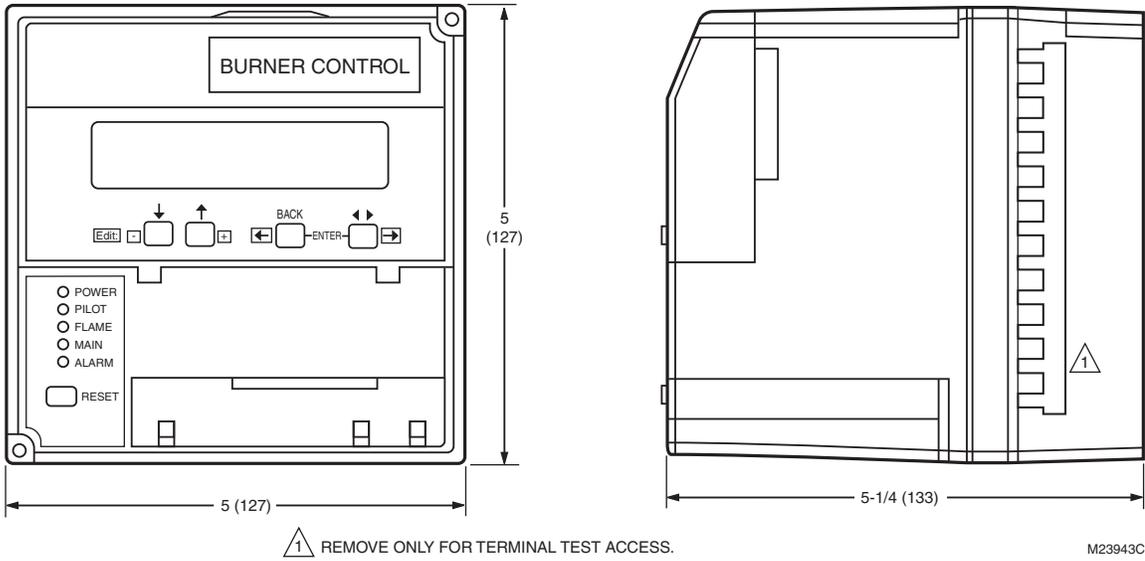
Mounting dimensions of CB780/CB784 Relay Module and 833-2725 Subbase, in inches (mm).
